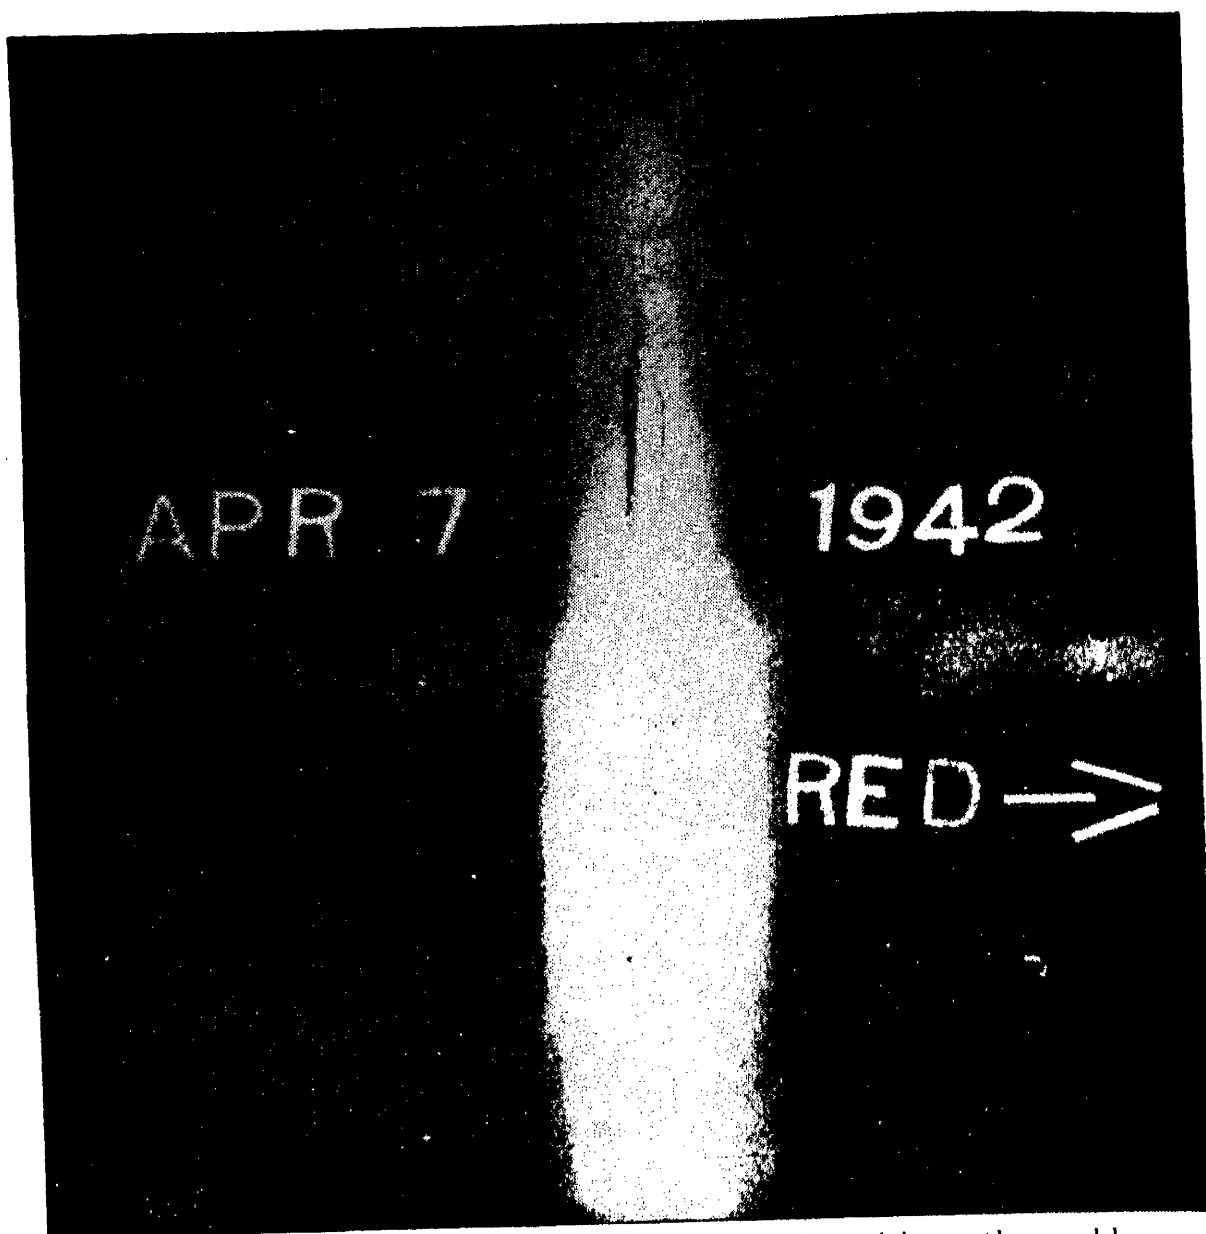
Cracks in a weld near its intersection with another weld.
